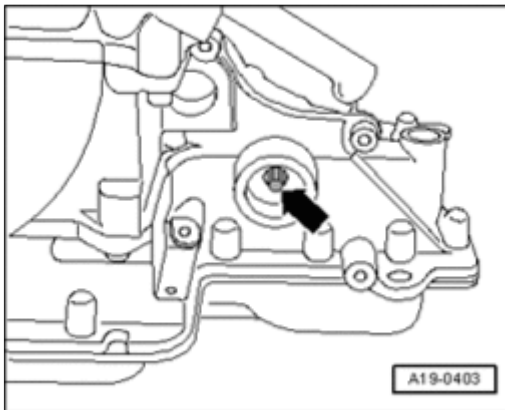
Removing/Installing Drive Shaft For Coolant Pump From Oil Pump
